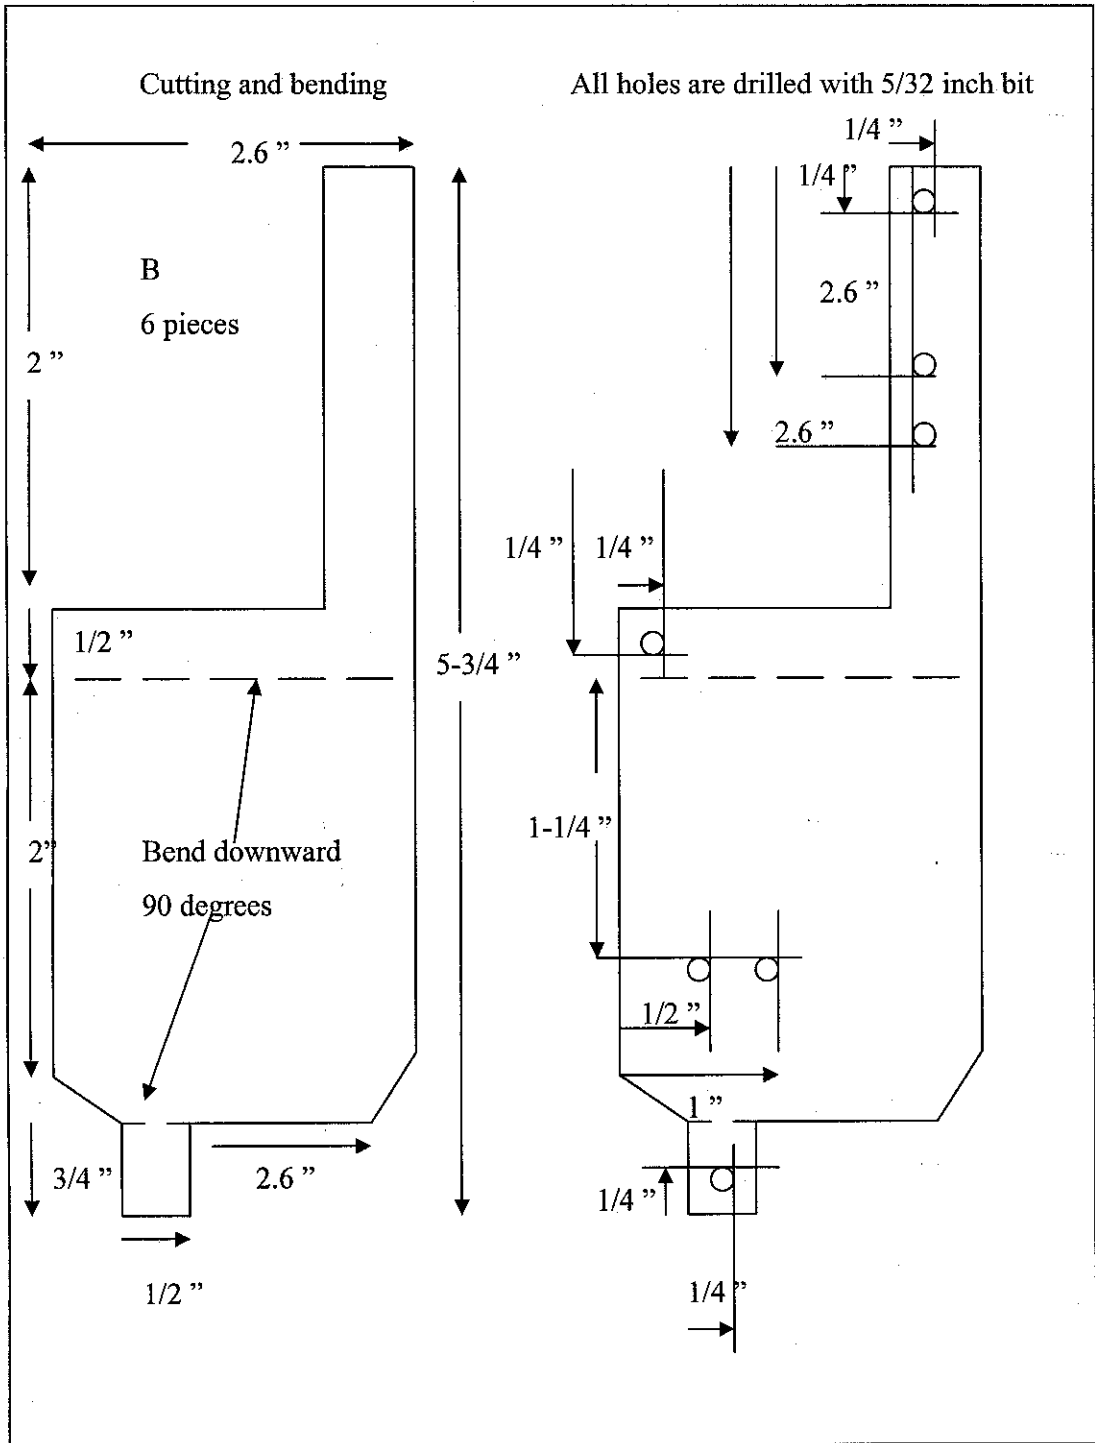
Cutting, bending, and drilling diagram for body piece (B)
